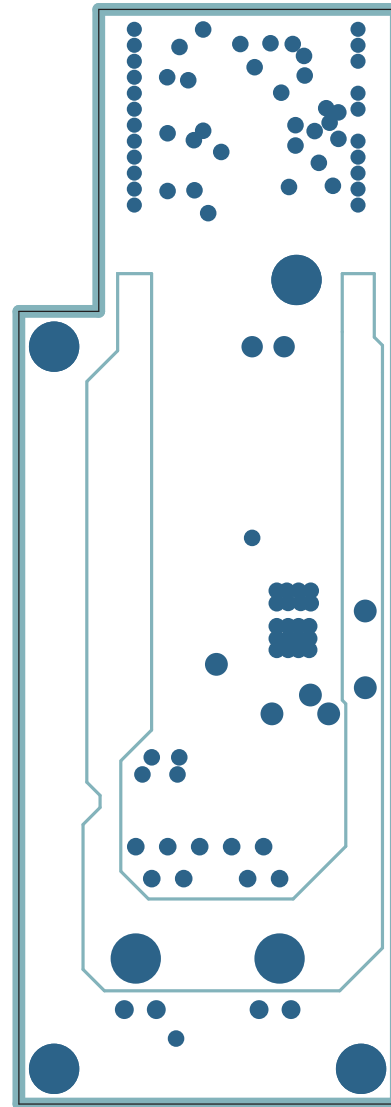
Bottom Board—Middle Layer 2 Copper
